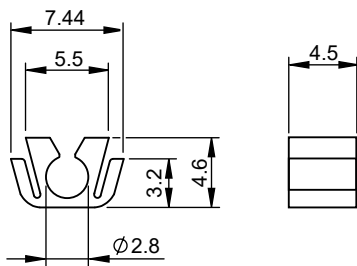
Cable clip for $\varnothing = 2.4$ mm
